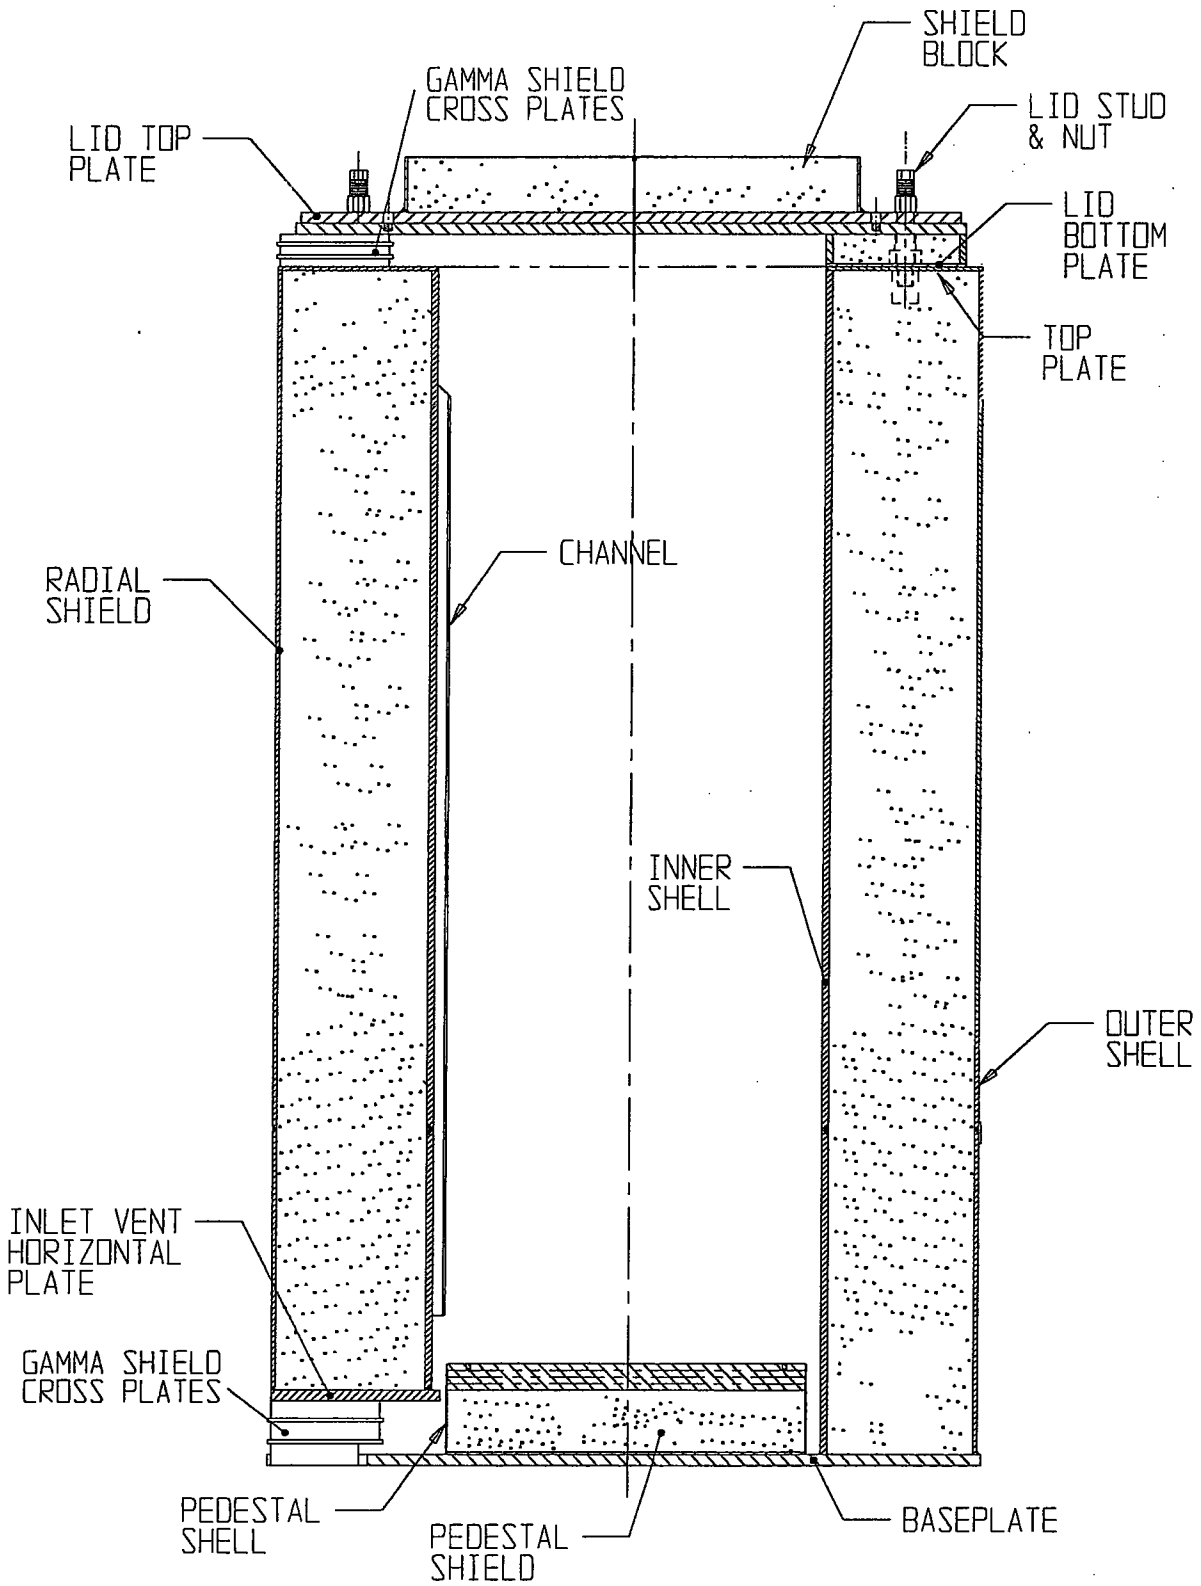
A; HI-STORM 100S OVERPACK CROSS SECTIONAL ELEVATION VIEW
